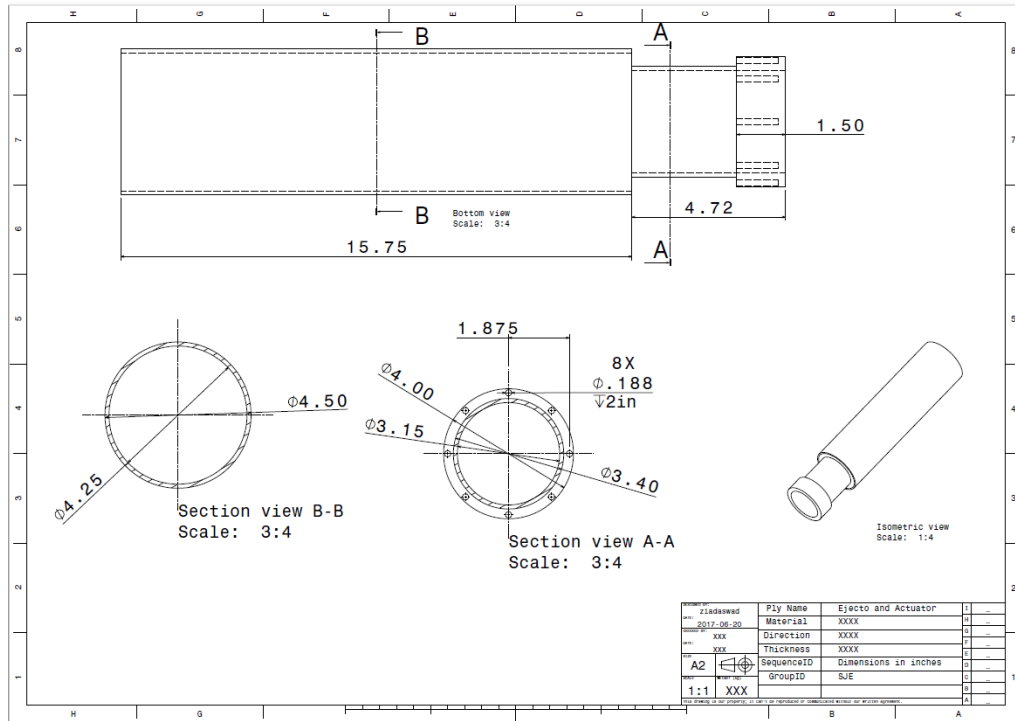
The Shroud, the Actuator and the Flange Integrated CAD Drawing
